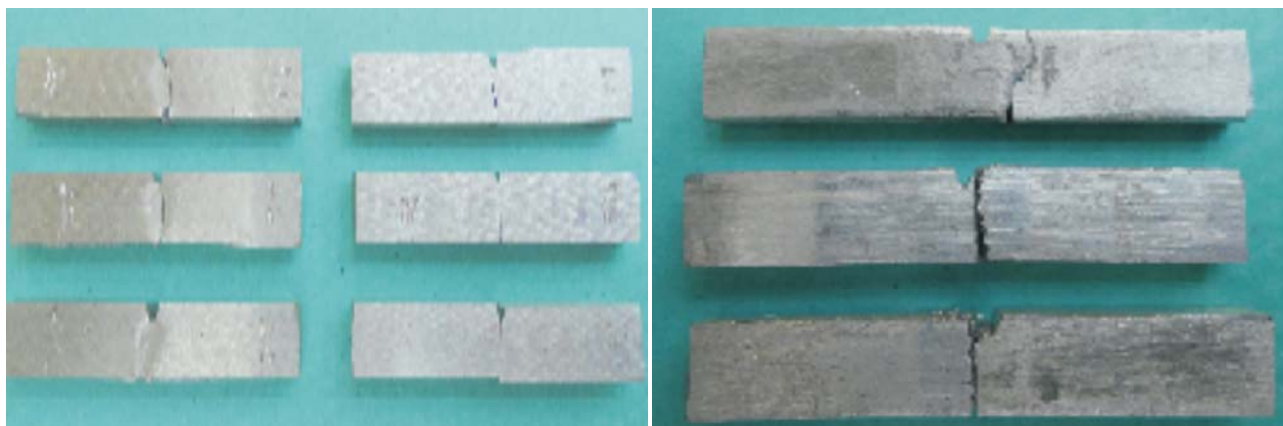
(a) Typical bending specimens for base alloys (b) typical bend tested specimens for welds
